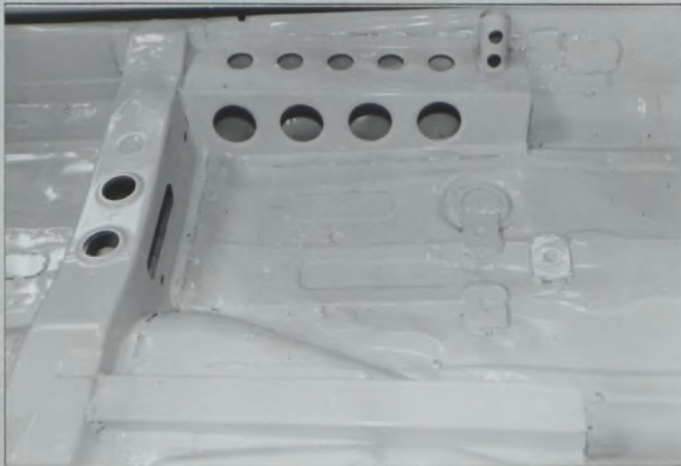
(SEATS ANCHORAGE POINTS)
